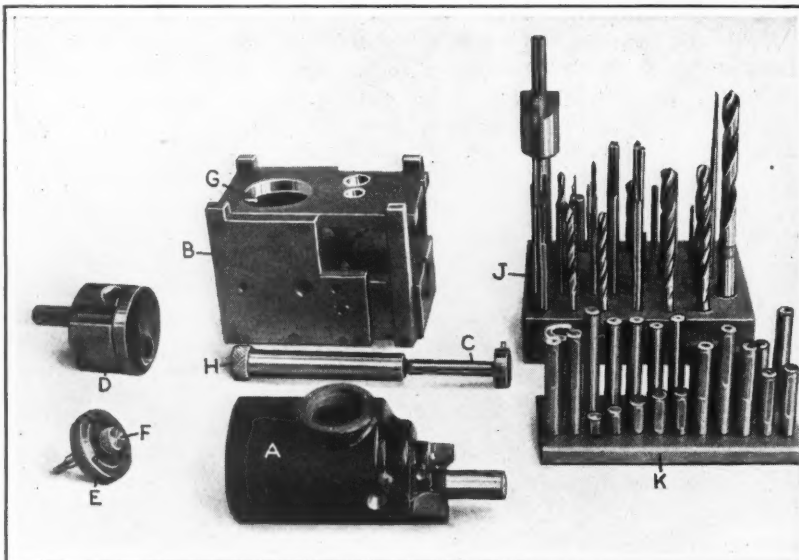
(A) Cinemotor Housing; (B) Drill Jig for Part A; (J) Block for holding Tools; (K) Plate for holding Depth Stops
